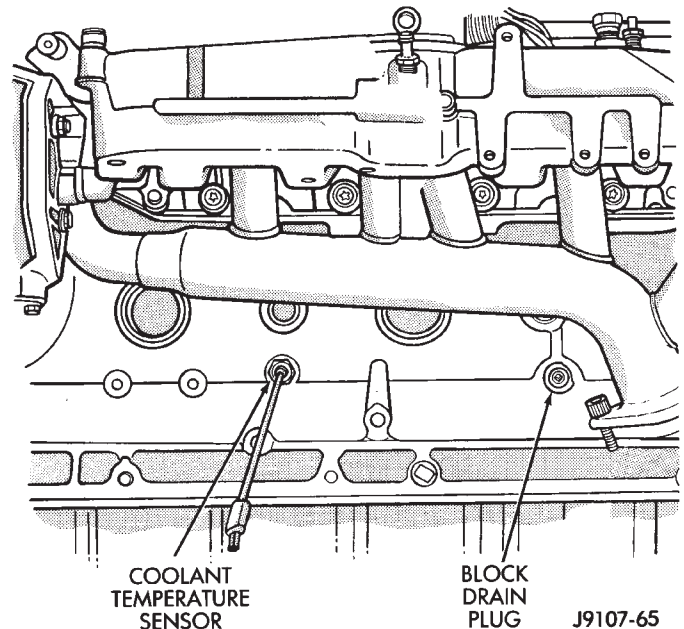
Drain Plug—4.0L 6 Cylinder Engine
